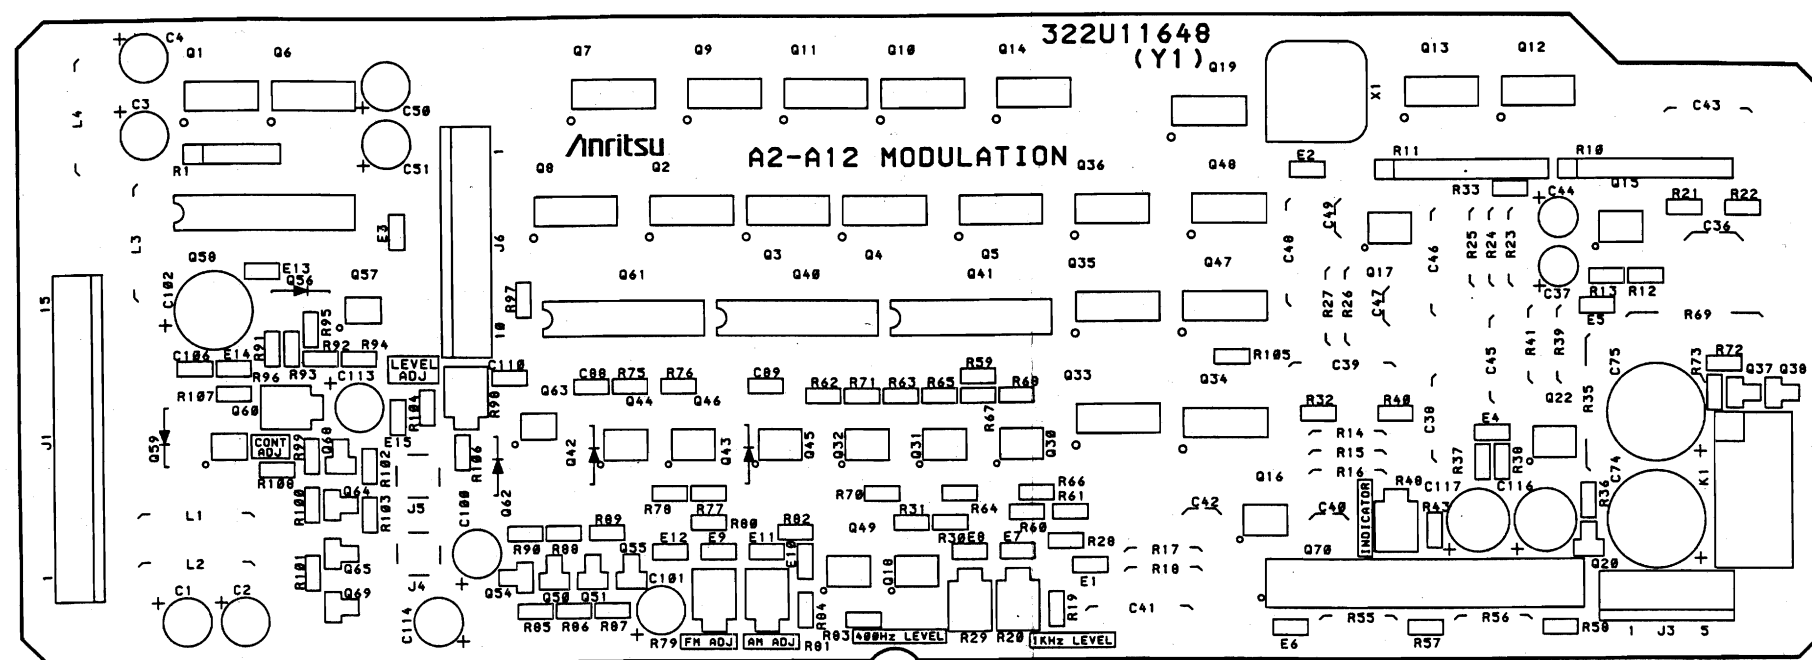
(1/2) A2-A12 MODULATION PC-Board Parts Layout (Parts Side) 14
